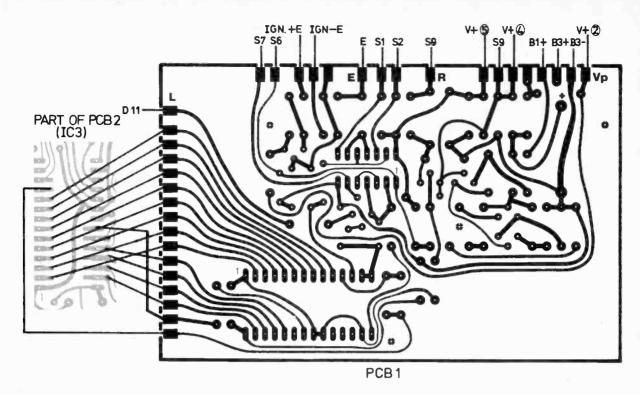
PCB1 printed circuit master and connecting details. Note the wiring on the left edge is soldered direct to IC3 pins on board PCB2 $\,$
